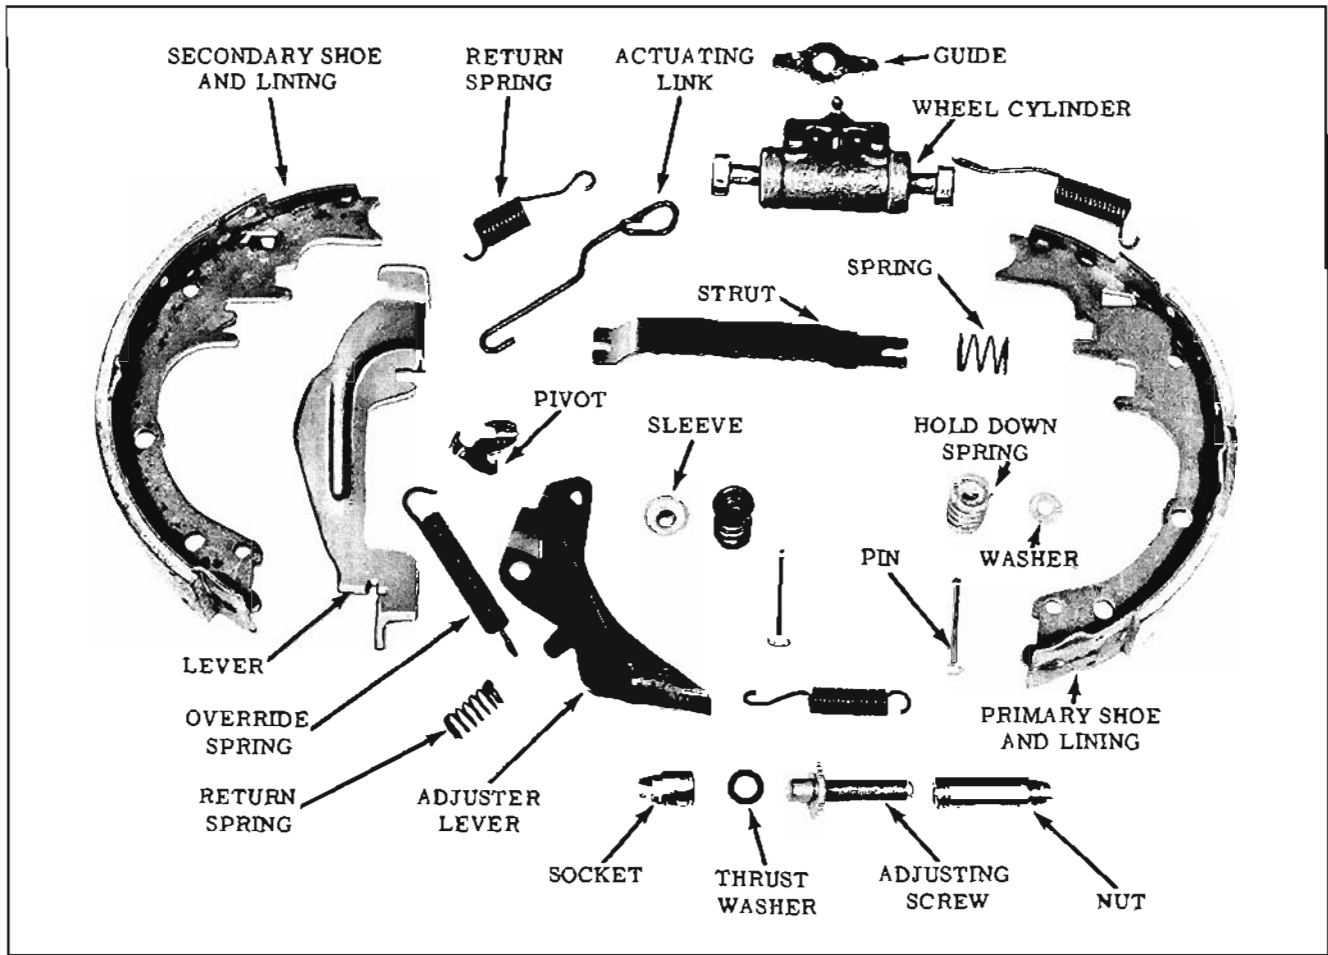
Brake Assembly (30, 31, 32 & 33 Series)
